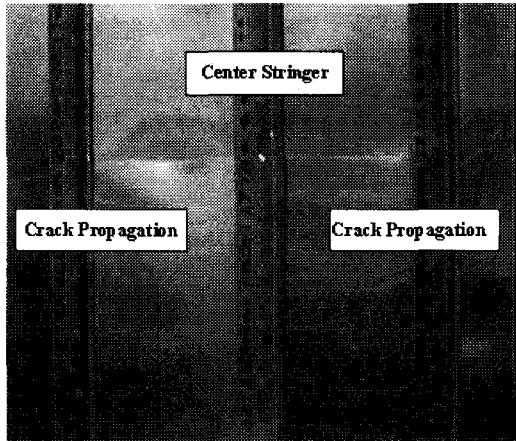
The photograph of fatigue crack propagation after processing the next stringer in the stiffened panel
